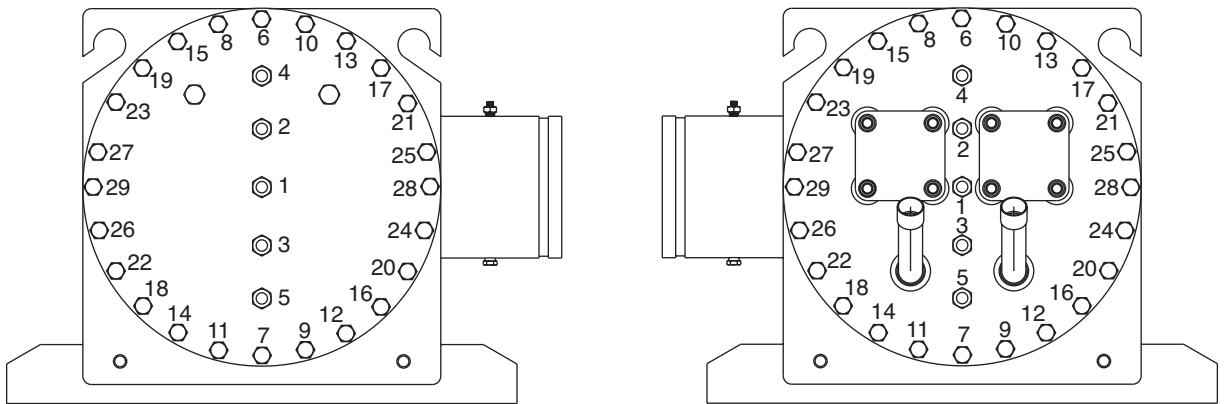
Bolt Tightening Sequence, 30RB110-130
